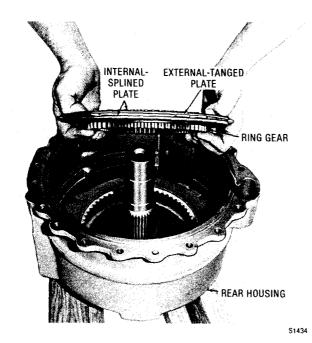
Removing high-range planetary ring gear and three clutch plates (TRT 2221-3, 2421-3 with overdrive)
